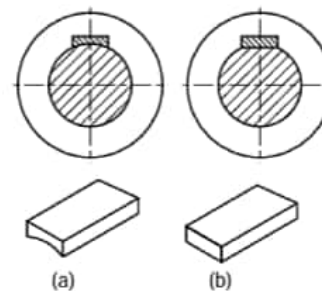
(a) Hollow Saddle Key (b) Flat Saddle Key
